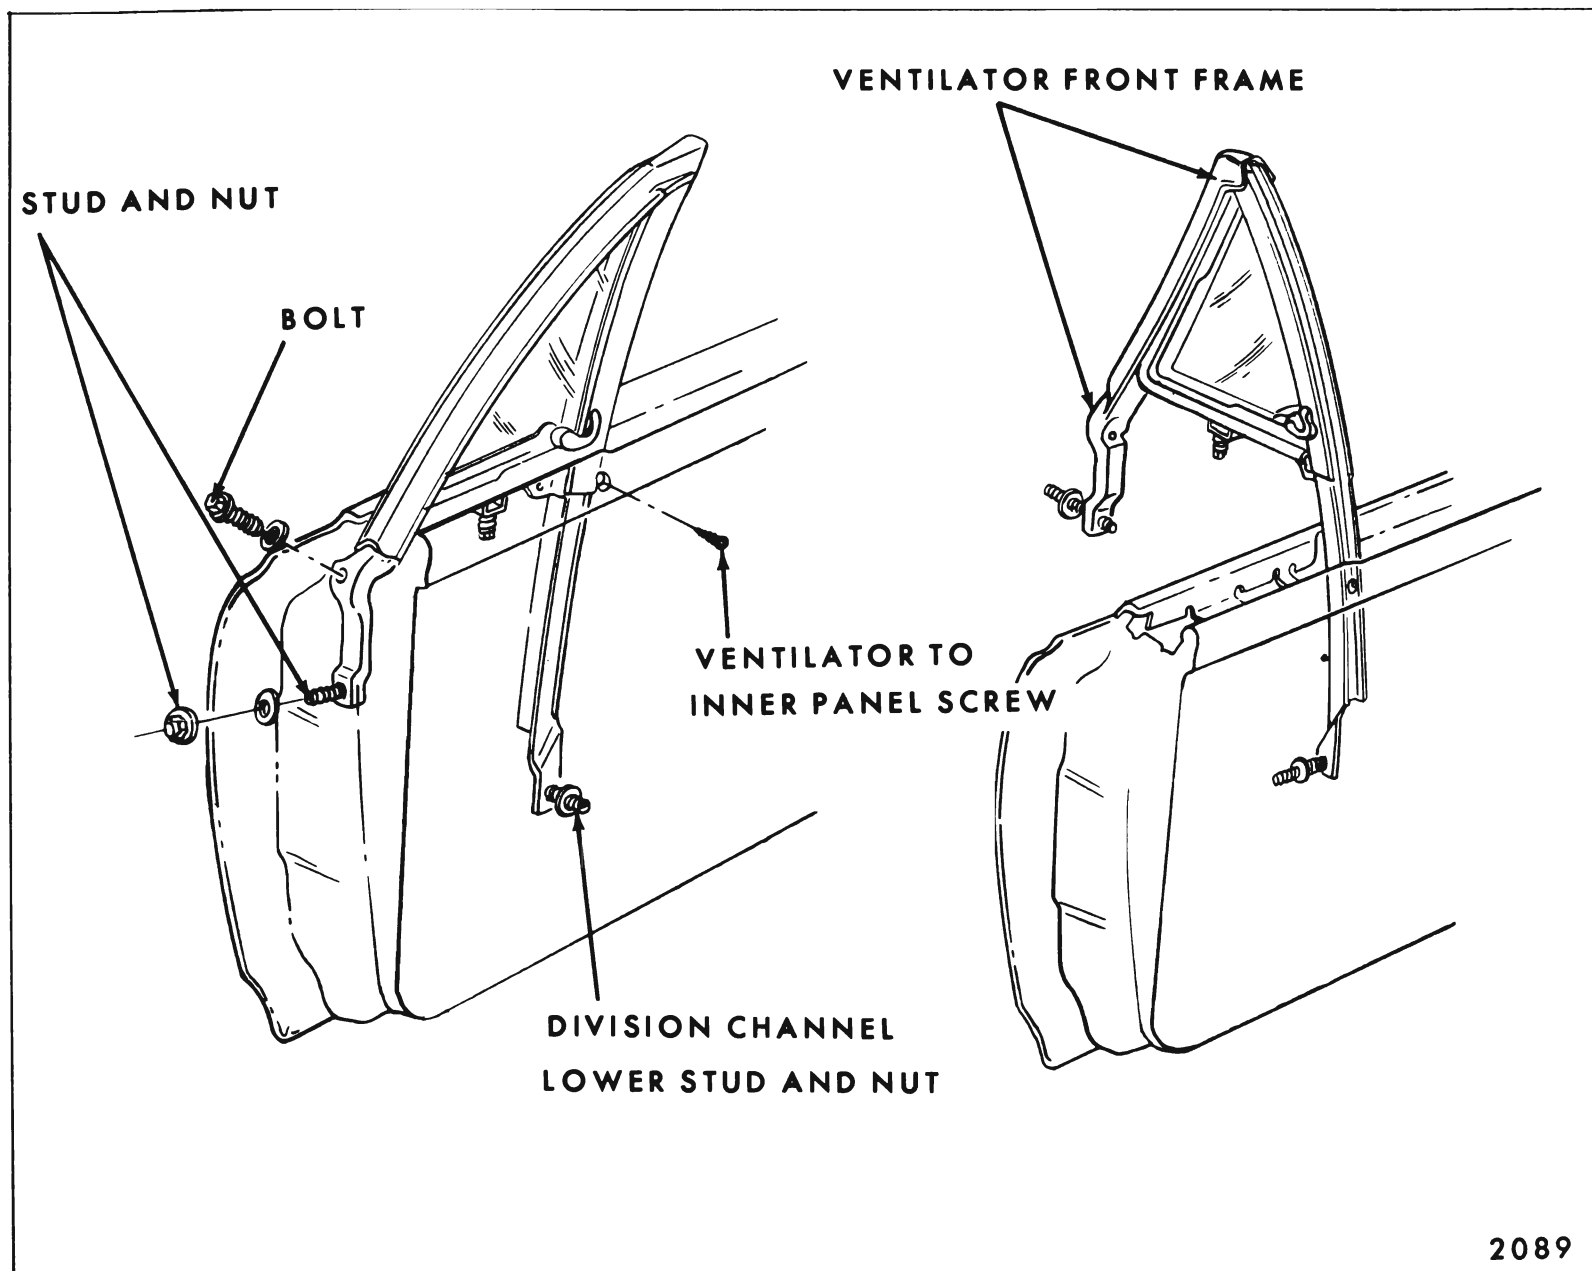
Front Door Ventilator Removal - "A" Style Shown - "X & Z" Similar
